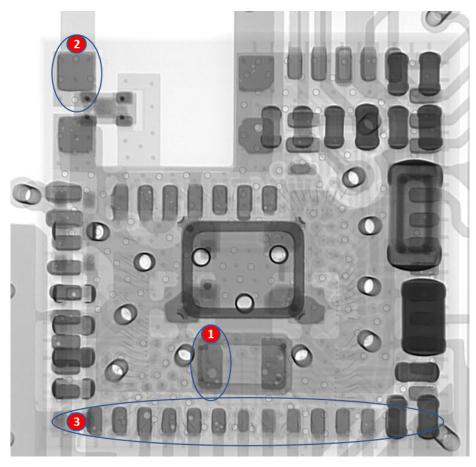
X-ray of a SiP Module Properly Soldered to a PCB
